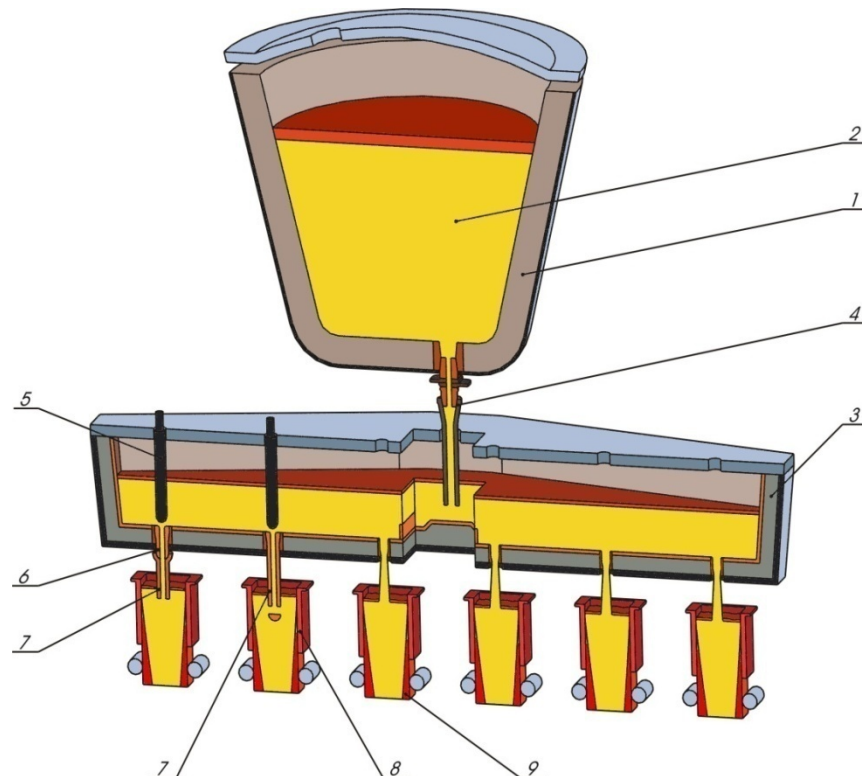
The general view of six-strand continuous-casting machine intermediate ladle when closed jet (left) and open jet (right) pouring: 1 - steel-teeming ladle; 2 - molten metal; 3 - intermediate ladle; 4 - protective pipe; 5 - locking monoblock device; 6 - metering nozzle; 7 - submerged nozzle; 8 - crystallizer; 9 - billet
